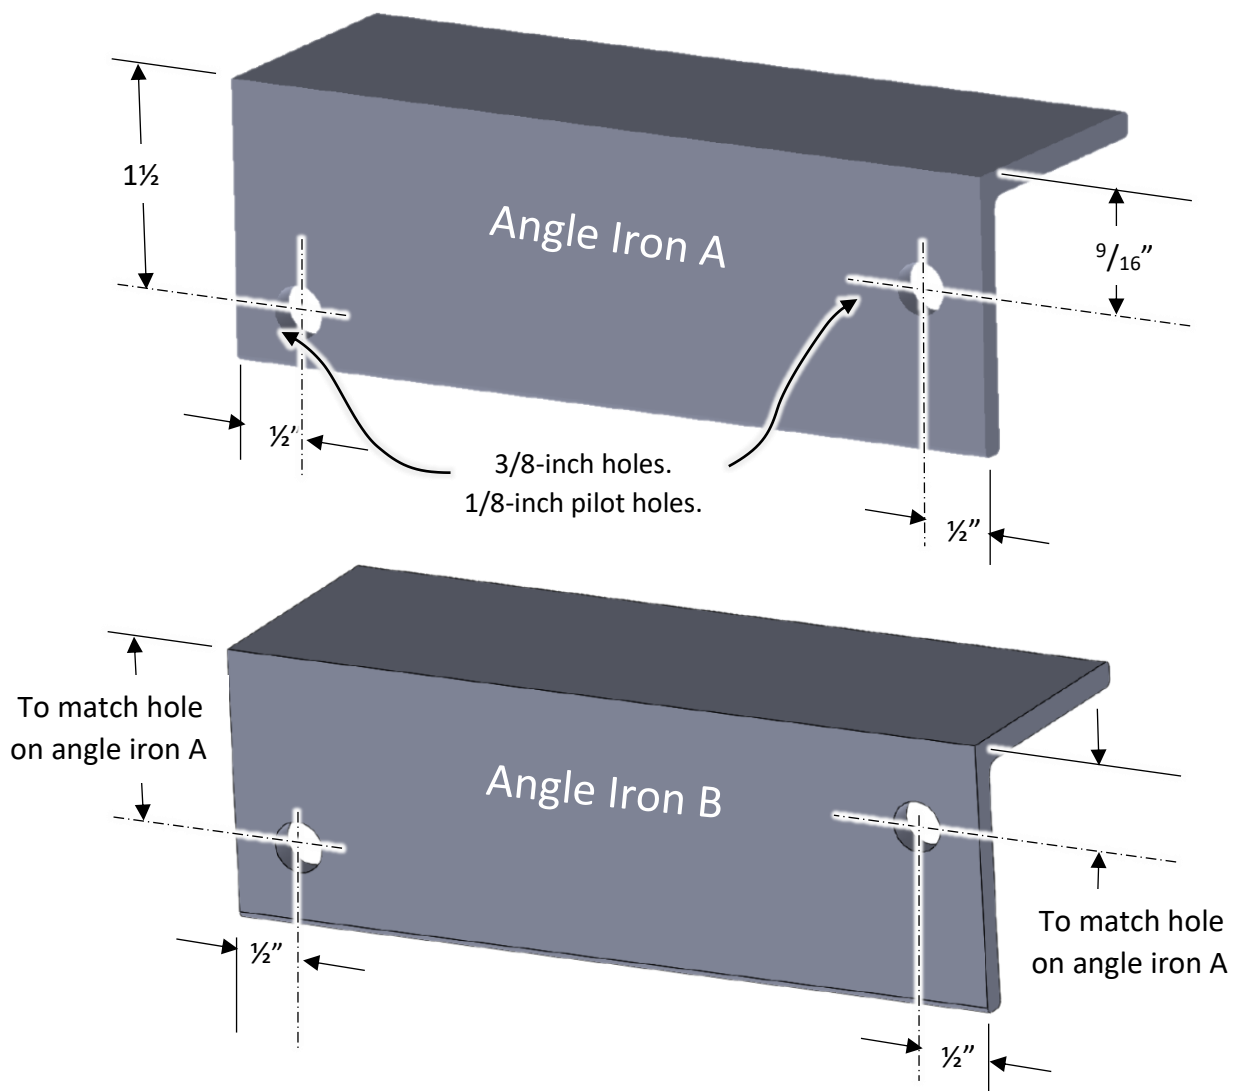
Details for marking and drilling holes in Angle Iron A and Angle Iron B
